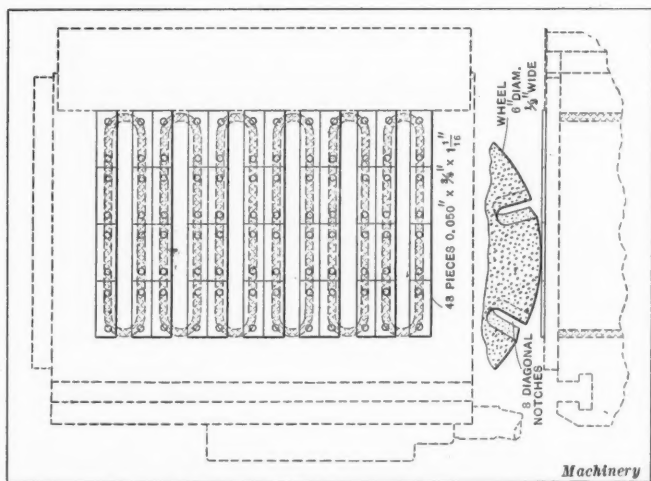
Diagram showing Arrangement of Pieces held on Chuck shown in Fig. 3
